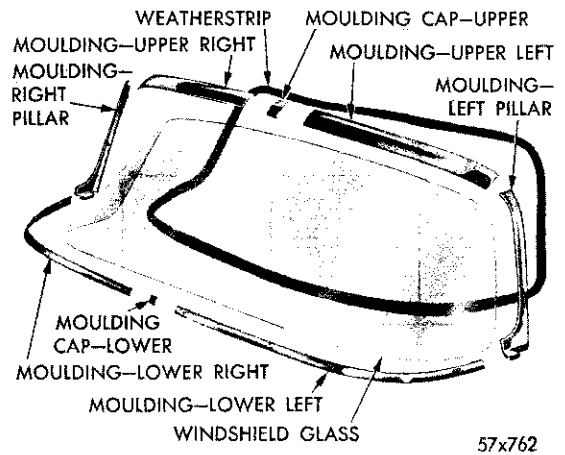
Windshield and Moulding Assembly (Imperial Models)
